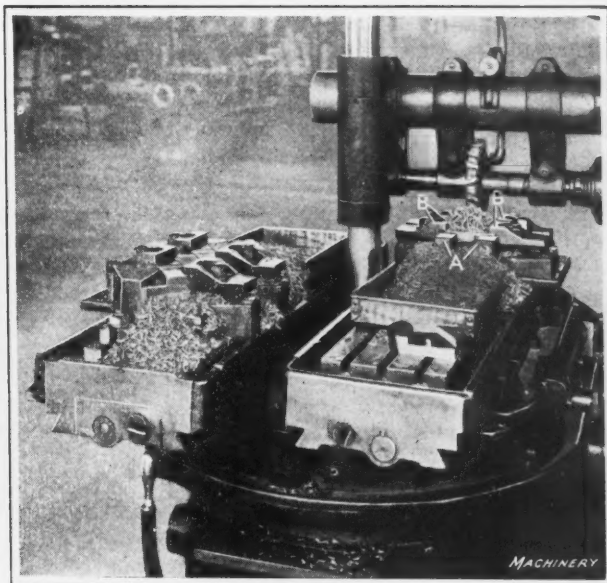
Indexing Milling Machine equipped for performing Fifth and Sixth Operations on Turret Revolving Pawls
